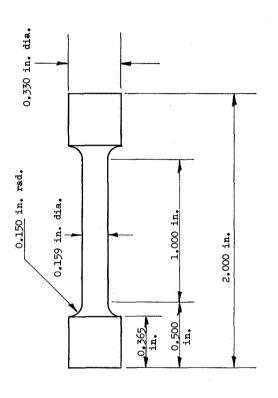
Tensile test specimen for alloy greater than 0.225 in. thick
